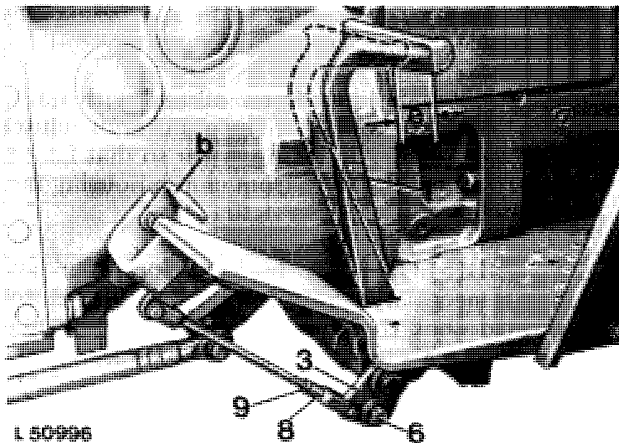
Adjusting Clutch Pedal and Free Travel on Tractors Equipped with Single-Stage Clutch
